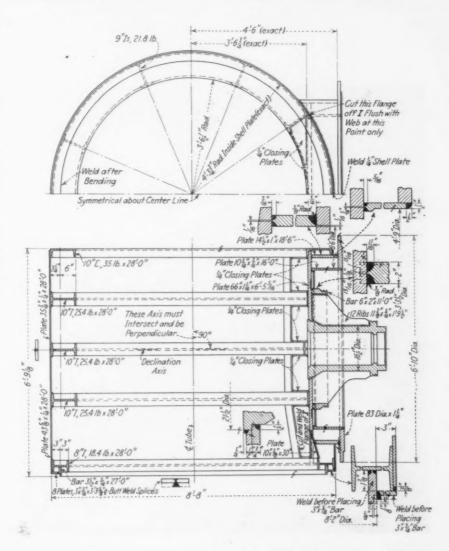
The centerpiece was welded in fixtures to assure correct alinement of the various parts. After all parts were tacked securely, the centerpiece was removed from the fixture for completion of the welds.
